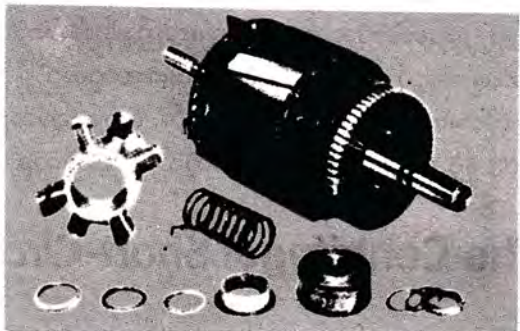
A partly dismantled rotor and parts of the centrifugal mechanism.
